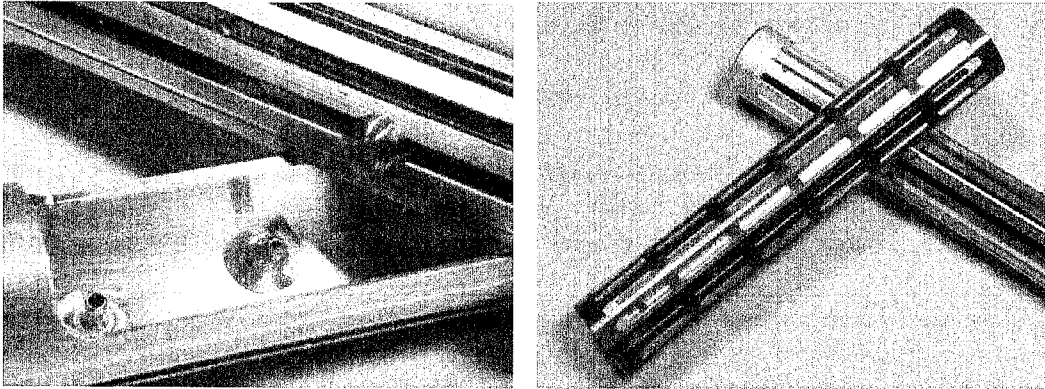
A closeup detail of the pneumatic inlets for each row of balloon actuators (left) and an early prototype X32-1502 on brass substrate actuator skin bonded to a tube. The grooves in the tube distribute pressure to each row. The final actuators were made using copper instead of brass.
